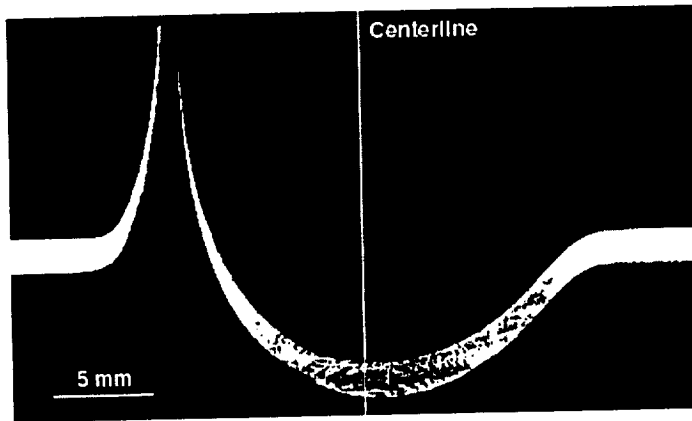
The deformed markers just below the tool shoulder at $z=8\text{mm}$ in Weld 38.
